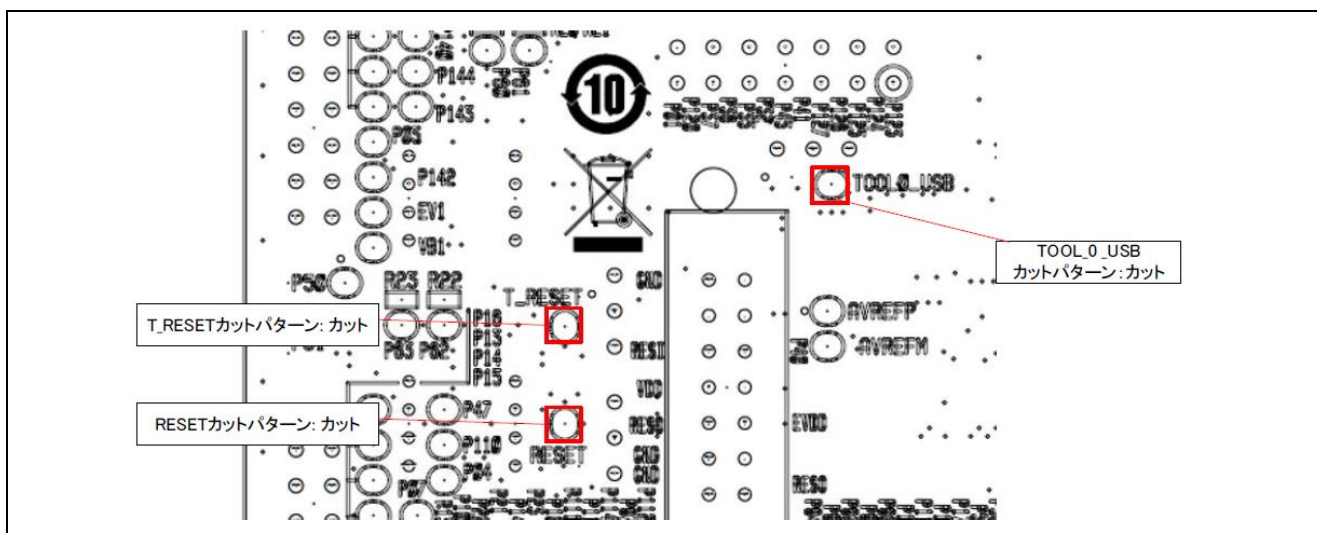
Settings for Using Emulator Connector (Solder Side)
